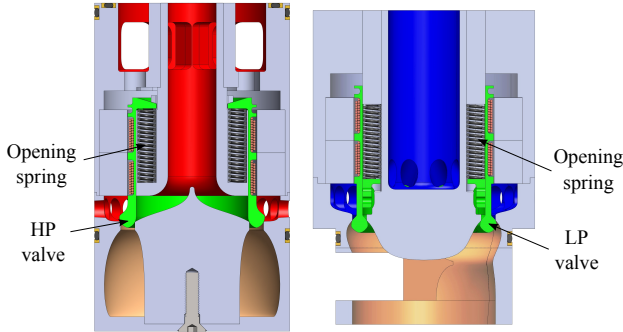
High pressure (left) and low pressure (right) valve cartridge assemblies, both shown in a section view revealing two of the four opening springs. The springs are dimensioned to keep the valve in the open position (both valves shown closed) during piston displacement flows.
